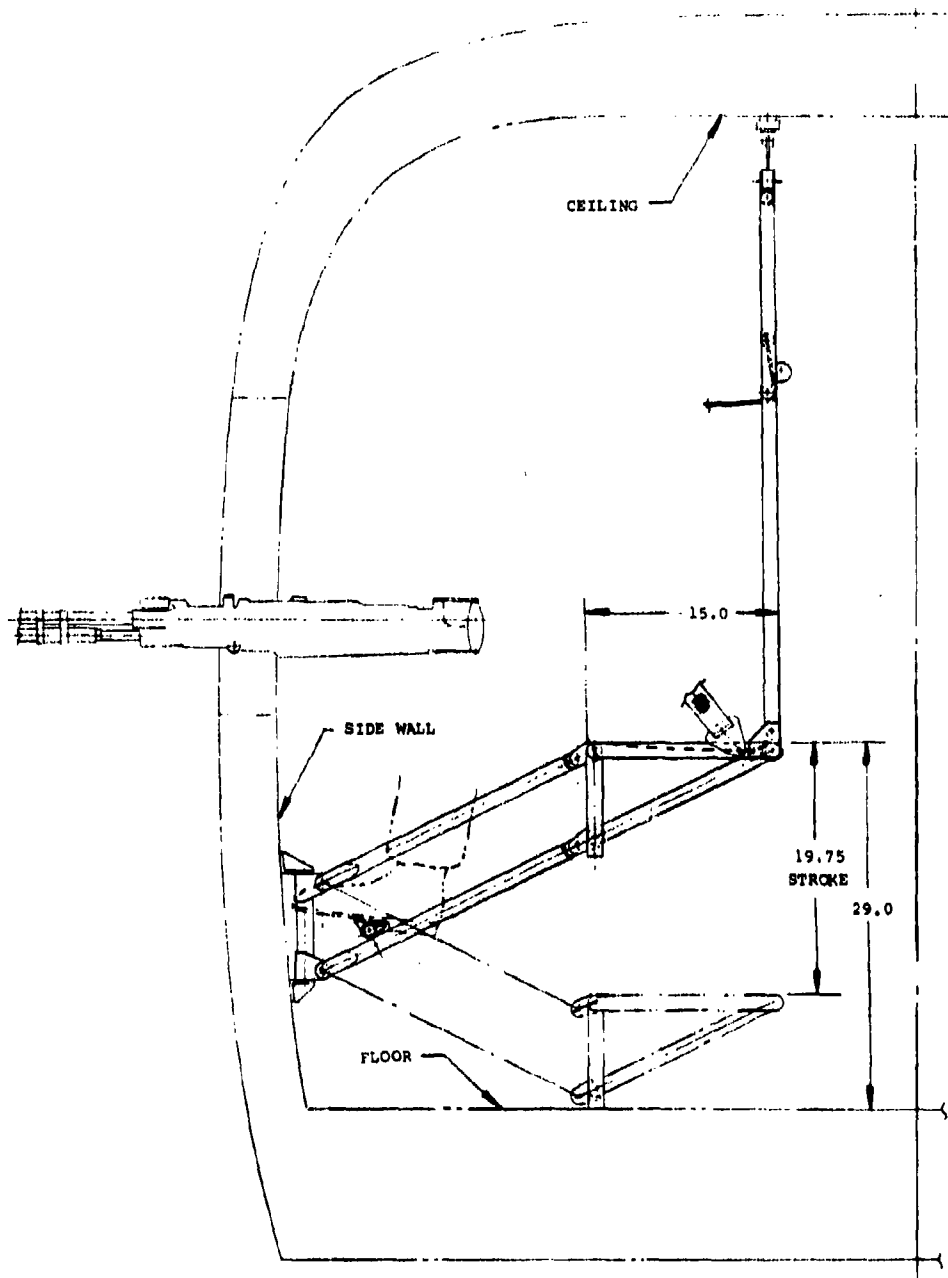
Concept D - Ceiling- and Wall-Mounted Fixed Unarmored Gunner's Seat (Sheet 1 of 2).
